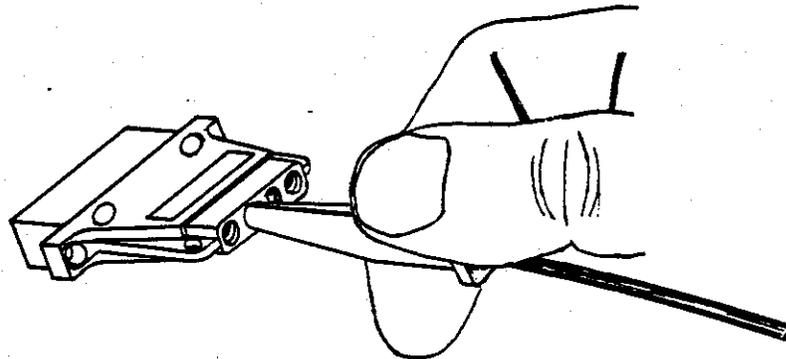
Pulling Contact/Cable Assembly Out of Connector
